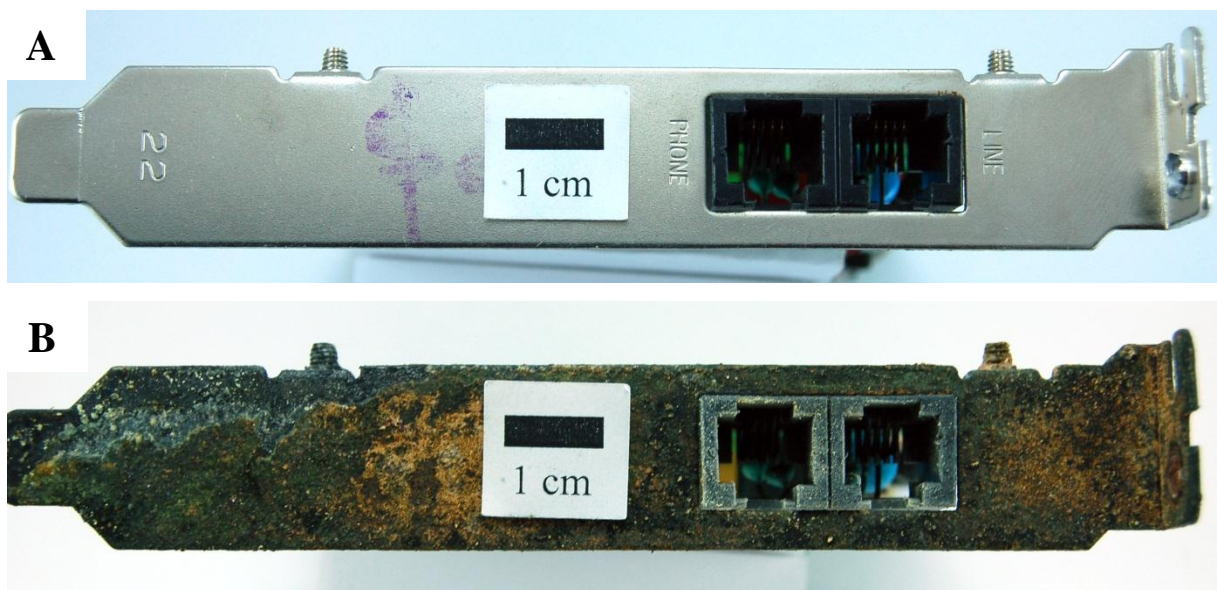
Photograph showing the PCB back mounting plate from location 1 (A) before exposure and (B) after exposure.
